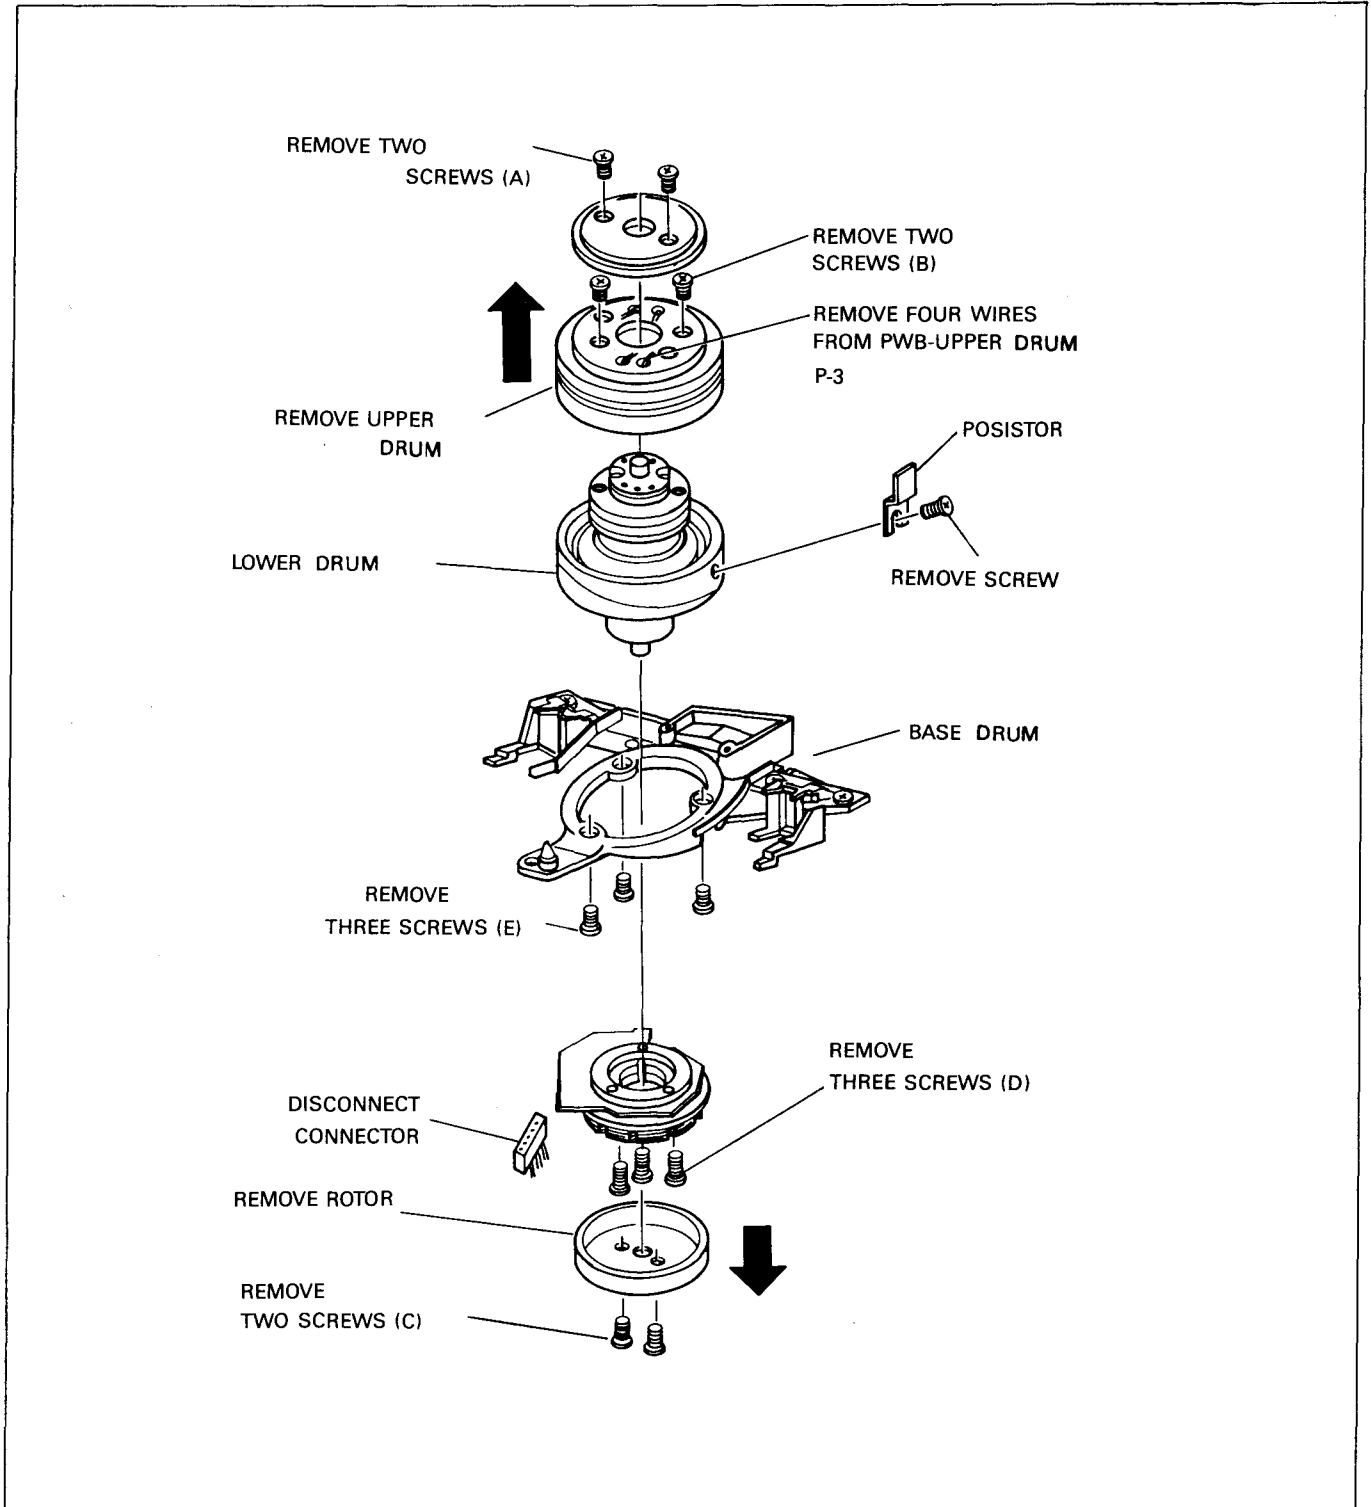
Video Head Removal and Drum Motor Assembly Removal.
